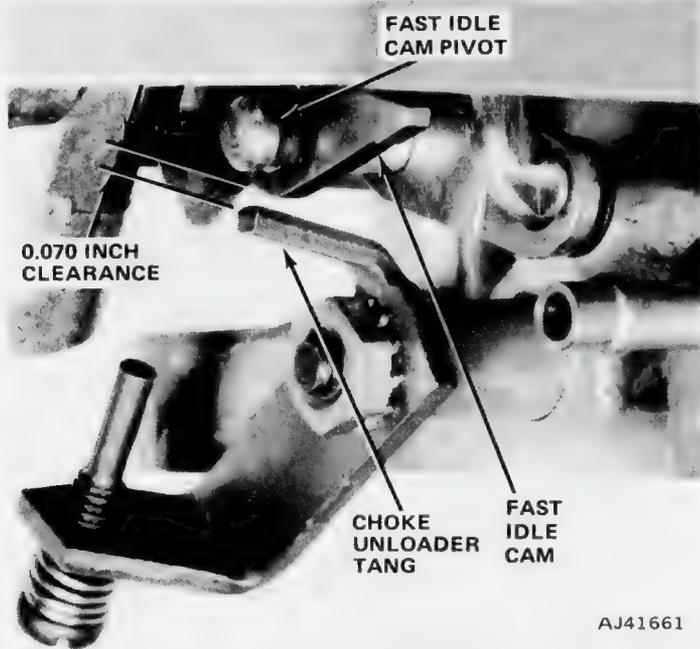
J-110 Unloader to Fast Idle Cam Clearance
